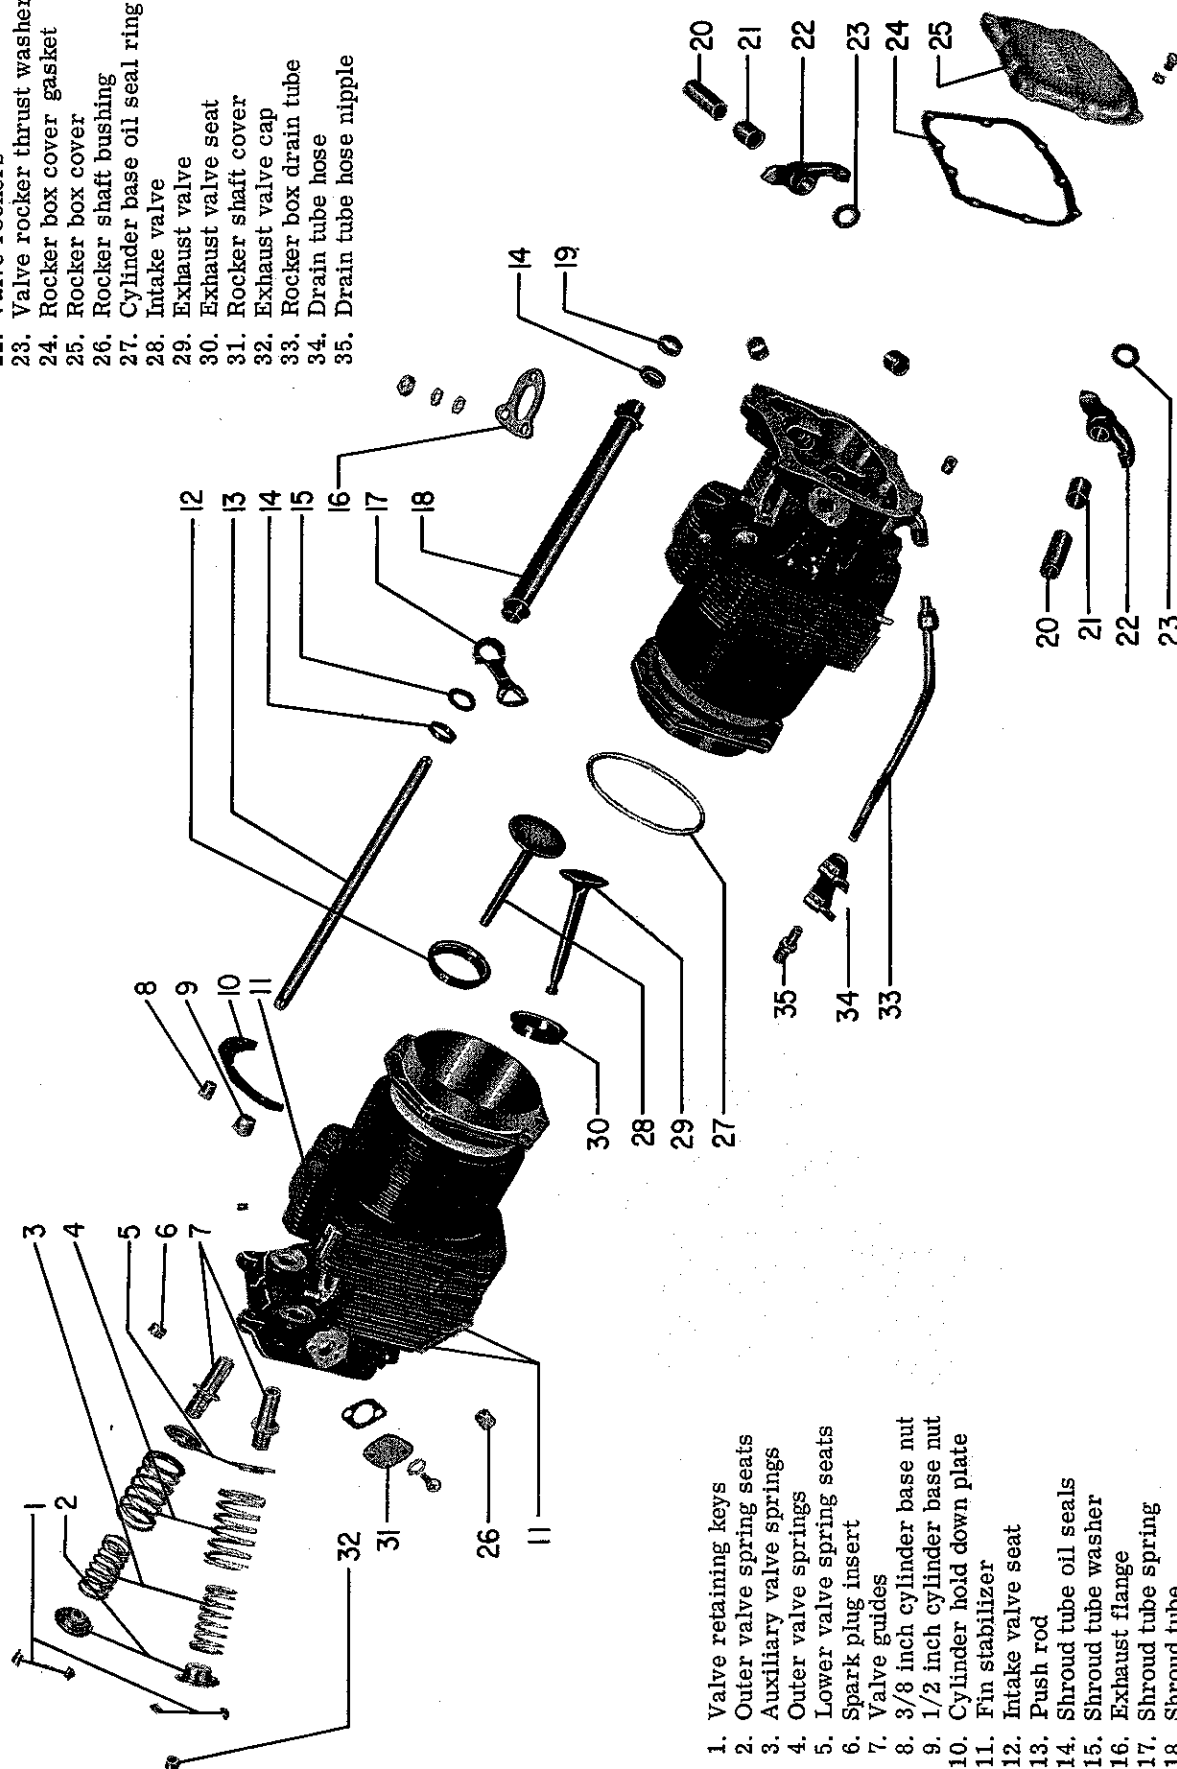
Angle Valve Cylinder Assembly - Down Exhaust
